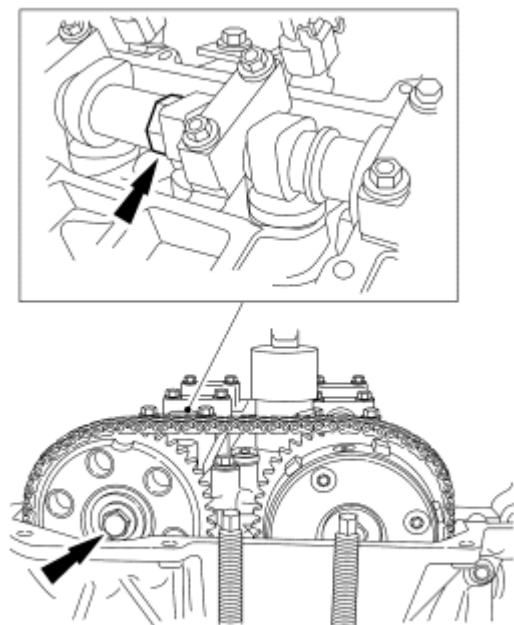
Locating Exhaust Camshaft Drive Gear Bolt
